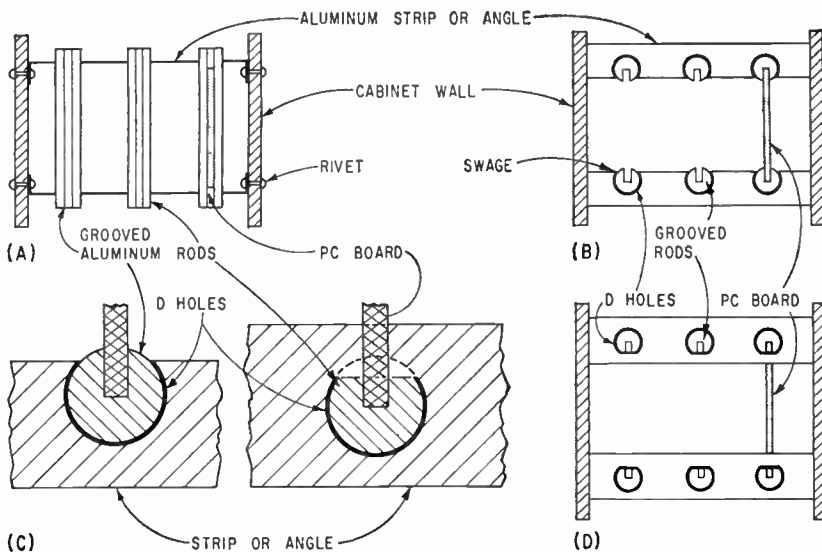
Details of how frames made of aluminum rod and punched and drilled strip are assembled in cabinet
